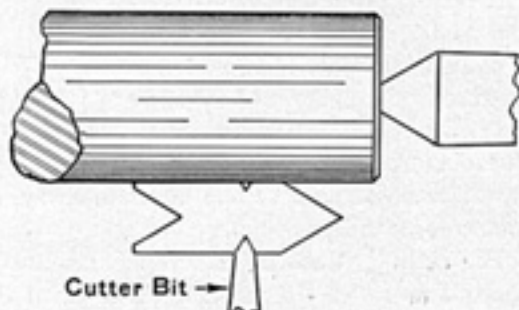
Cutter bit should be set square with work, as shown above, for cutting external screw threads.
